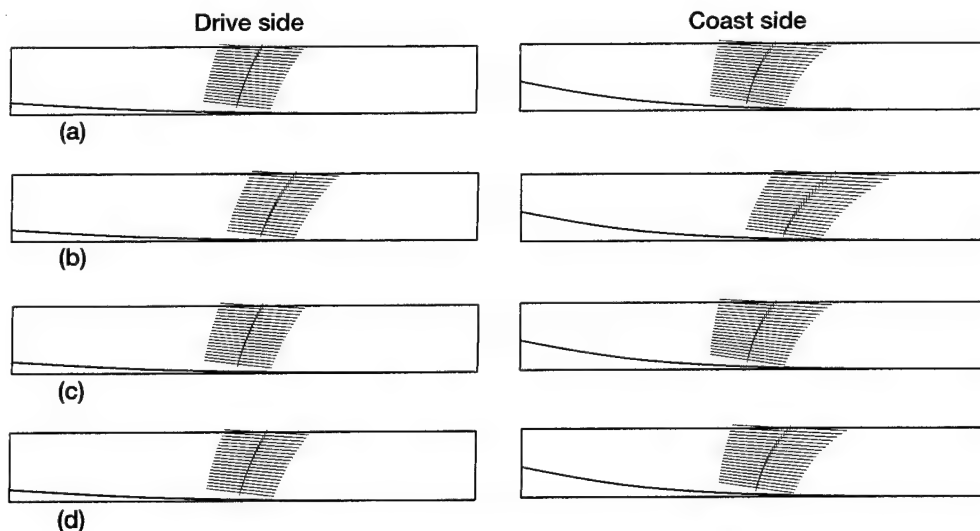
Design case 4: path of contact and bearing contact for following examples.
